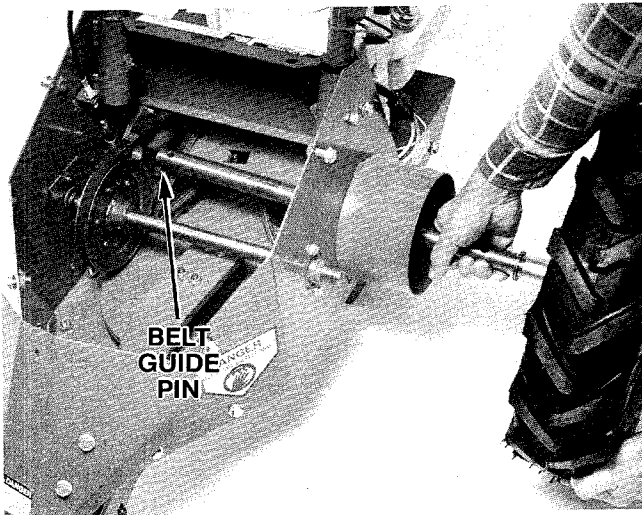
Reinserting the wheel shaft and jackshaft into the right-hand frame plate.
